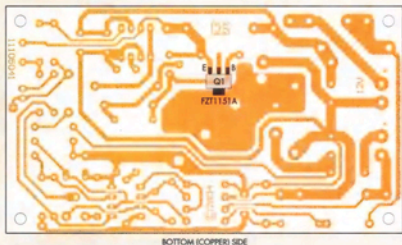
the mounting details for transistor Q1. It's soldered on the copper side of the board using a fine-tipped soldering iron.
